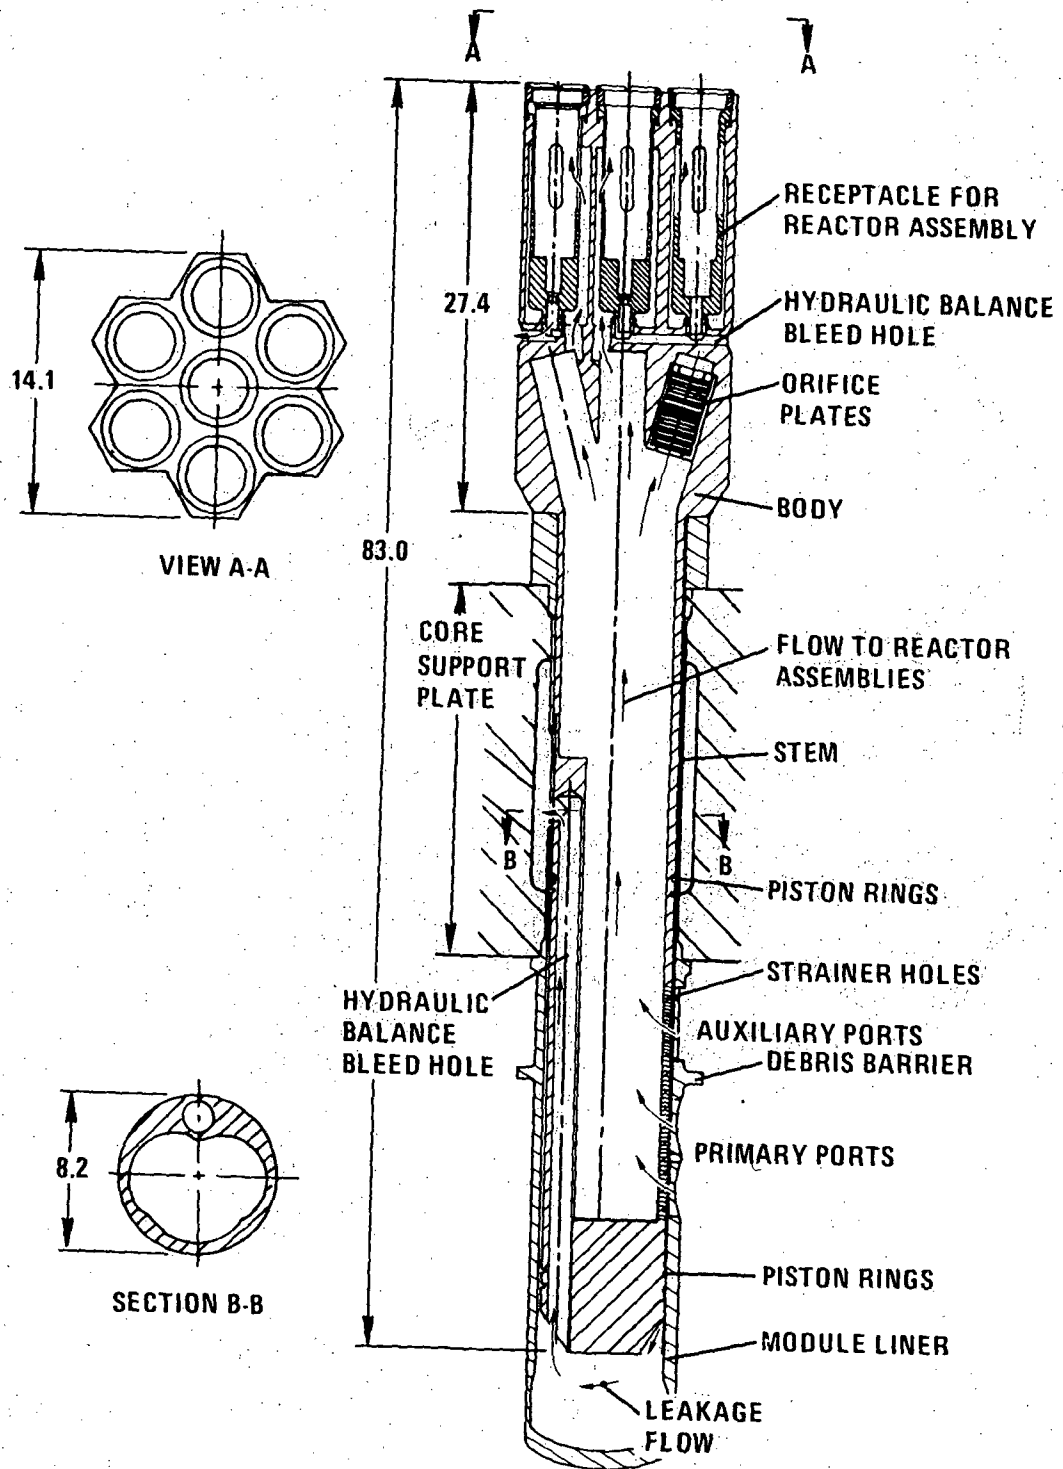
Elevation of Typical Lower Inlet Module
